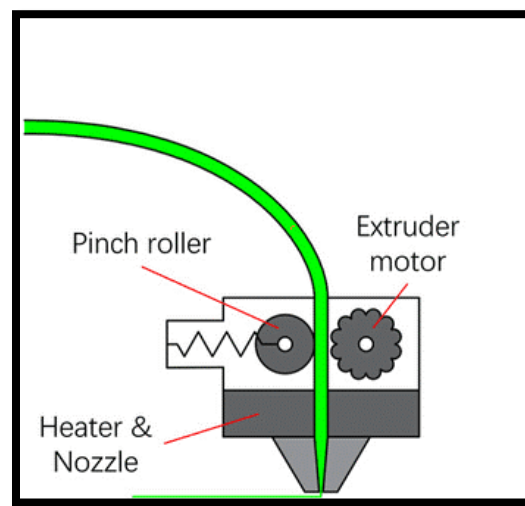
Pinch Roller and Extruder Motor Mechanism [13]
